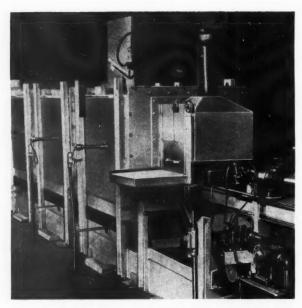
Discharge end of Tunnel Kiln showing various control equipment
